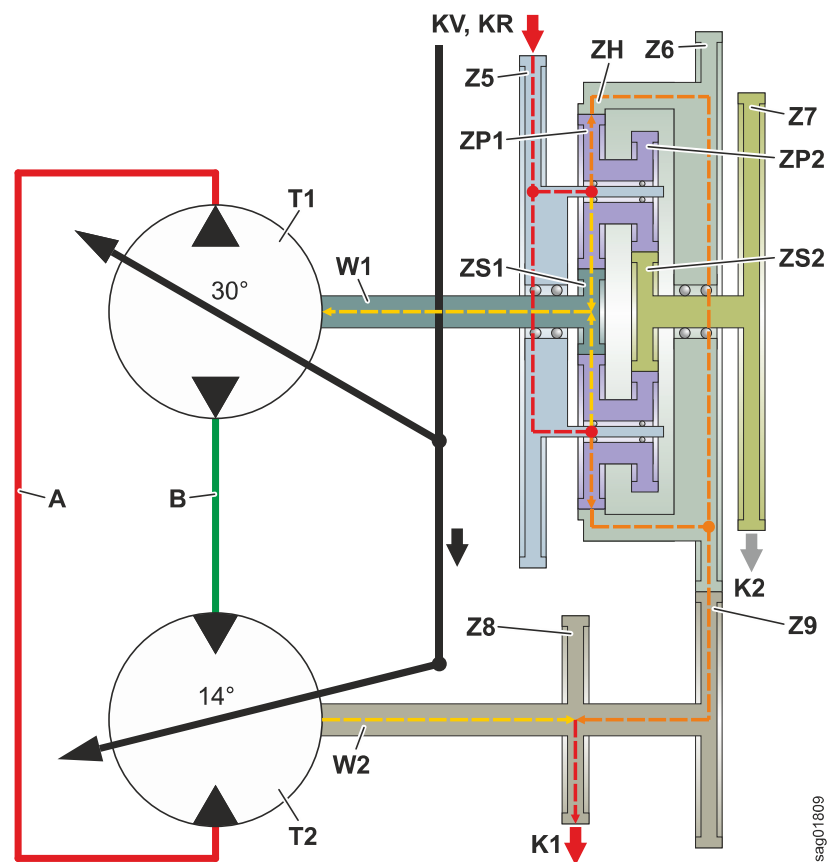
Machine moving and accelerating (clutch K1 closed)
